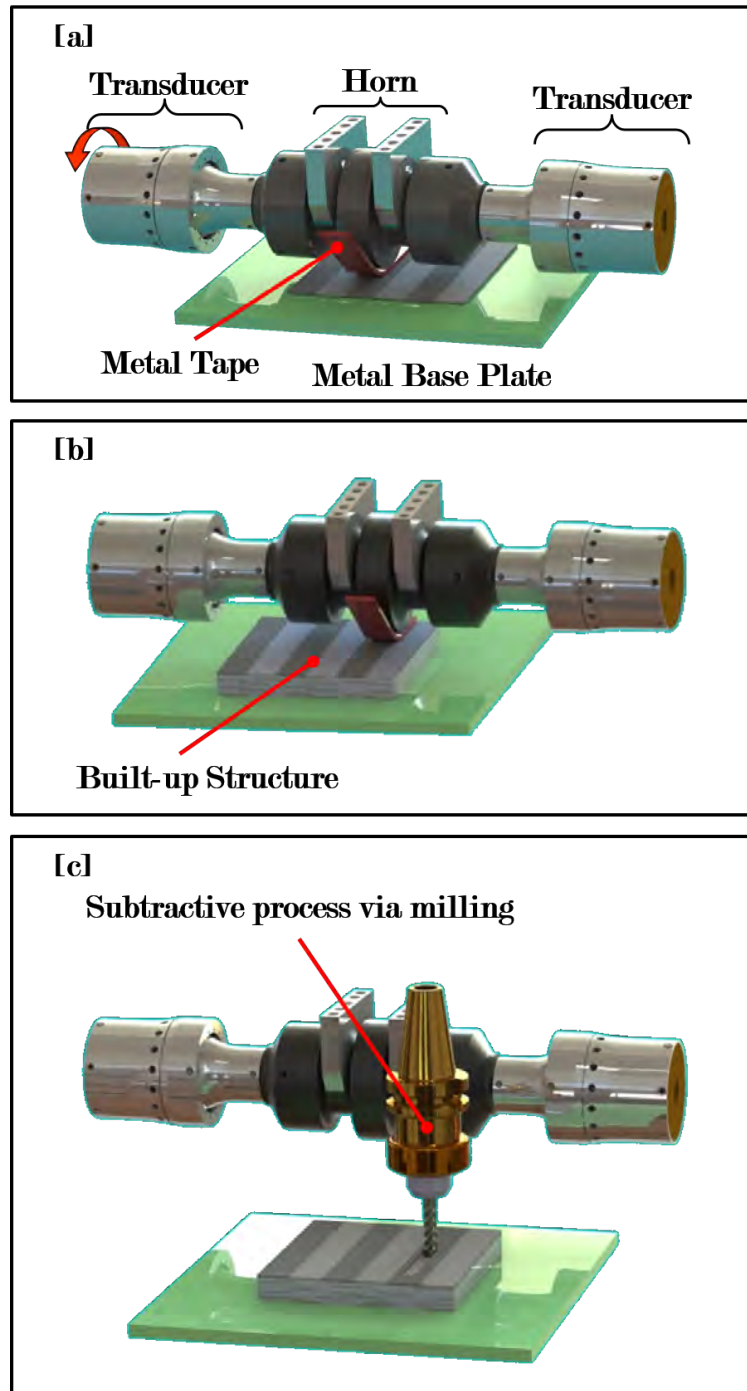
Ultrasonic additive manufacturing process. [a] Ultrasonic welding system welds metal tapes to base plate; [b] successive welding of tapes over multiple layers builds solid part; [c] periodic subtractive machining shapes and maintains uniform welding surface. Illustrations courtesy of Fabrisonic, LLC.
